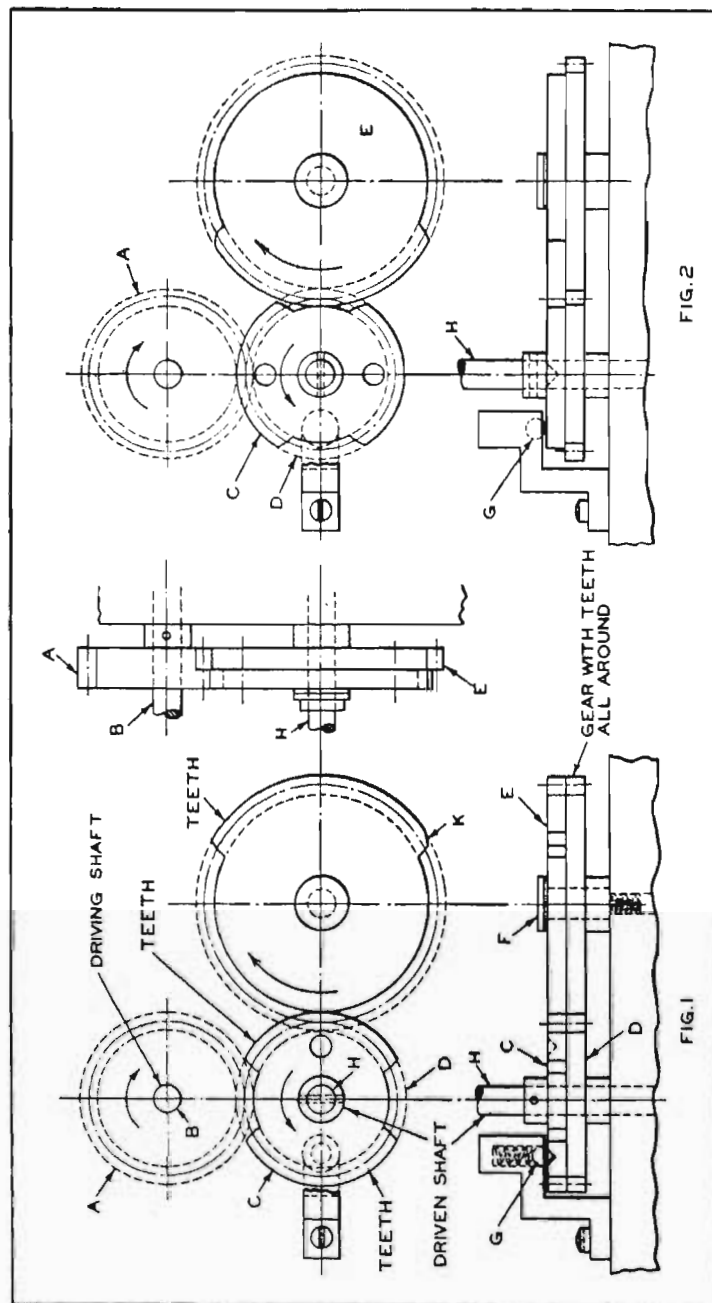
Mechanism by Means of which Shaft B Transmits a Half Revolution to Shaft H, Followed by a Rest Period Equal to One Revolution of Shaft B. Fig. 2. Same Mechanism with Shaft B Driving Shaft H while Gear E Remains Idle.
